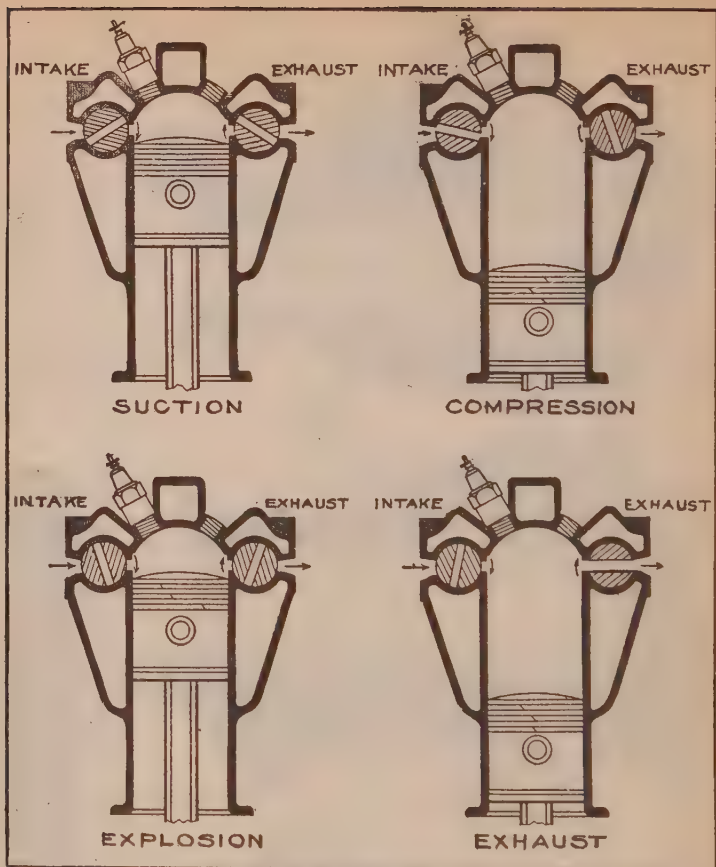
PLATE — SPEEDWELL ROTARY VALVE ENGINE.
